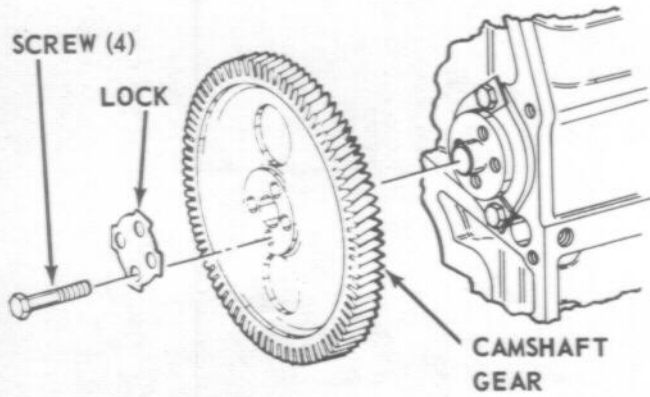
Timing gear cover and timing gears; removal and installation (sheet 1 of 2).
